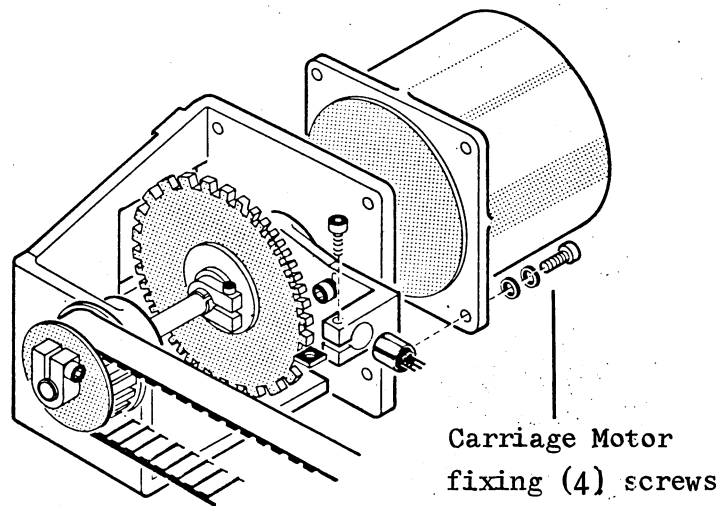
Carriage Drive Motor for the Mina Mechanics
